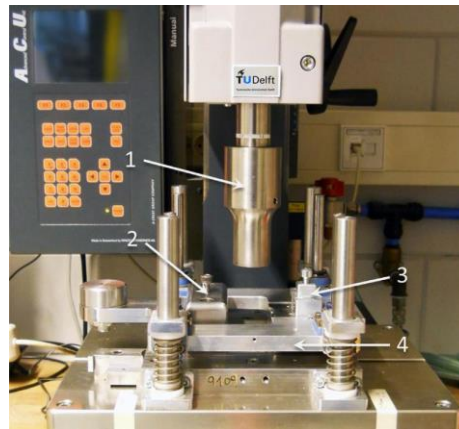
Custom made welding setup. 1: sonotrode, 2: clamp for the lower sample, 3: clamp for the upper sample and 4: sliding platform [9].
